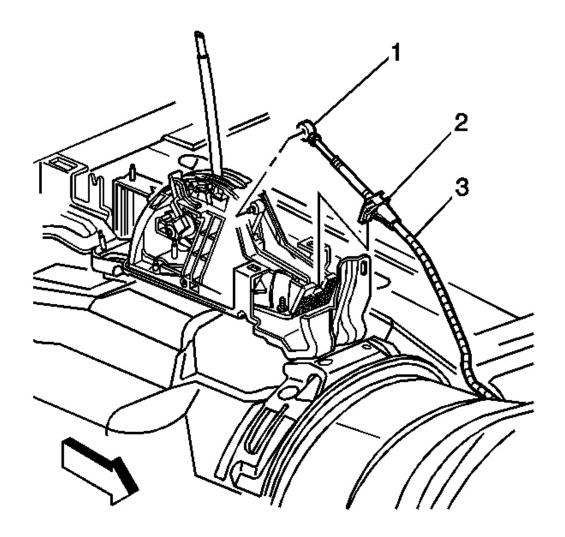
View Of Shift Control Cable & Shifter Courtesy of GENERAL MOTORS CORP.
